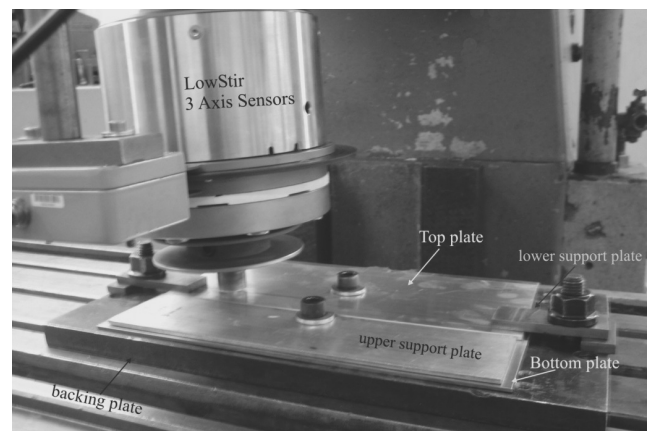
FSLW using a milling machine with a Lowstir™ force measuring device
